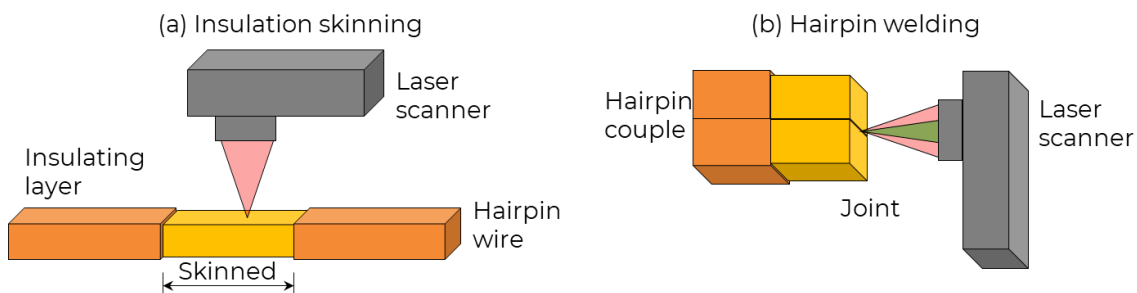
Schematic representation of (a) wire stripping and (b) hairpin welding
